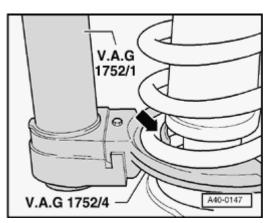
Ensuring Correct Seating Of Coil Spring In Spring Holder V.A.G 1752/4 Courtesy of VOLKSWAGEN UNITED STATES, INC.
